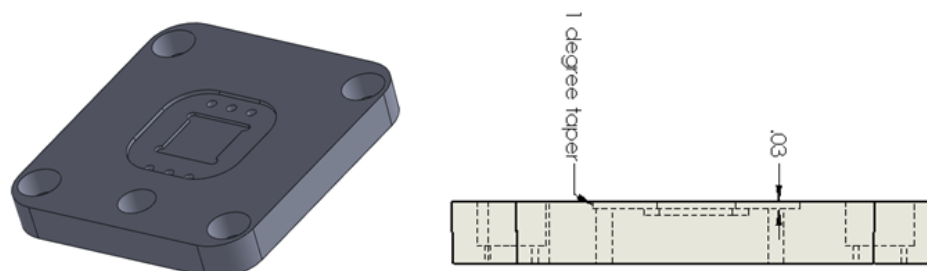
CAD model of sprue gate aluminum insert design with drawing showing key dimensional components (units are in inches).
